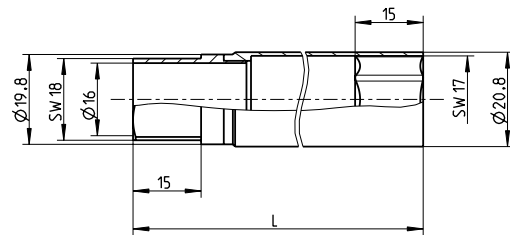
Mounting wrench Type 1300A4... (see accessories)
